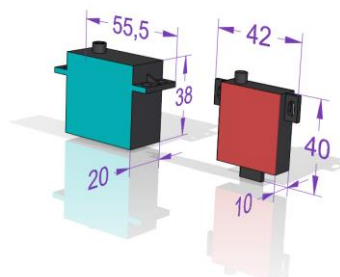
Servo actuator dimensions; Cyan – standard design servo actuator; Red – slim design servo actuator
